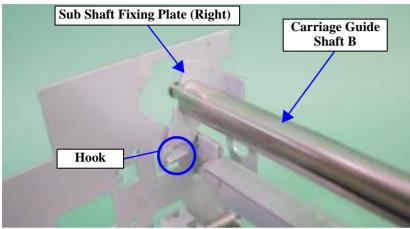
Removing the Sub Shaft Fixing Plate (Right)
